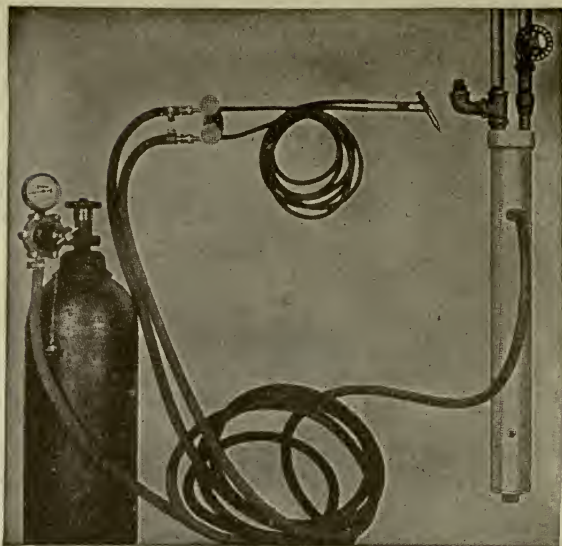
Oxygen and Natural Gas Lead Burning Equipment (Oxweld).
